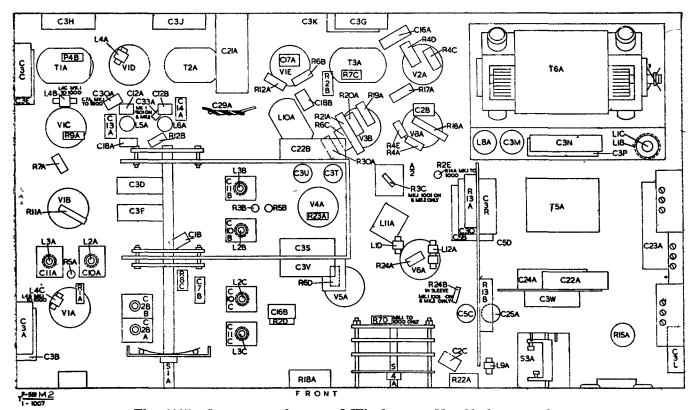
Component layout of Wireless set No. 62, bottom view
